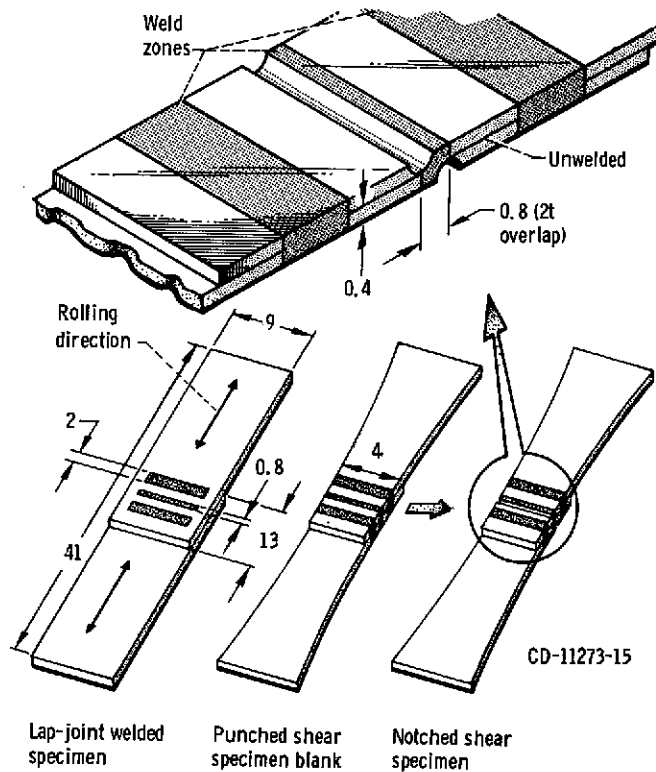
Configuration of hot-press weldment showing how specimens for tensile shear and stress-rupture shear tests were obtained. (Dimensions are in mm).
